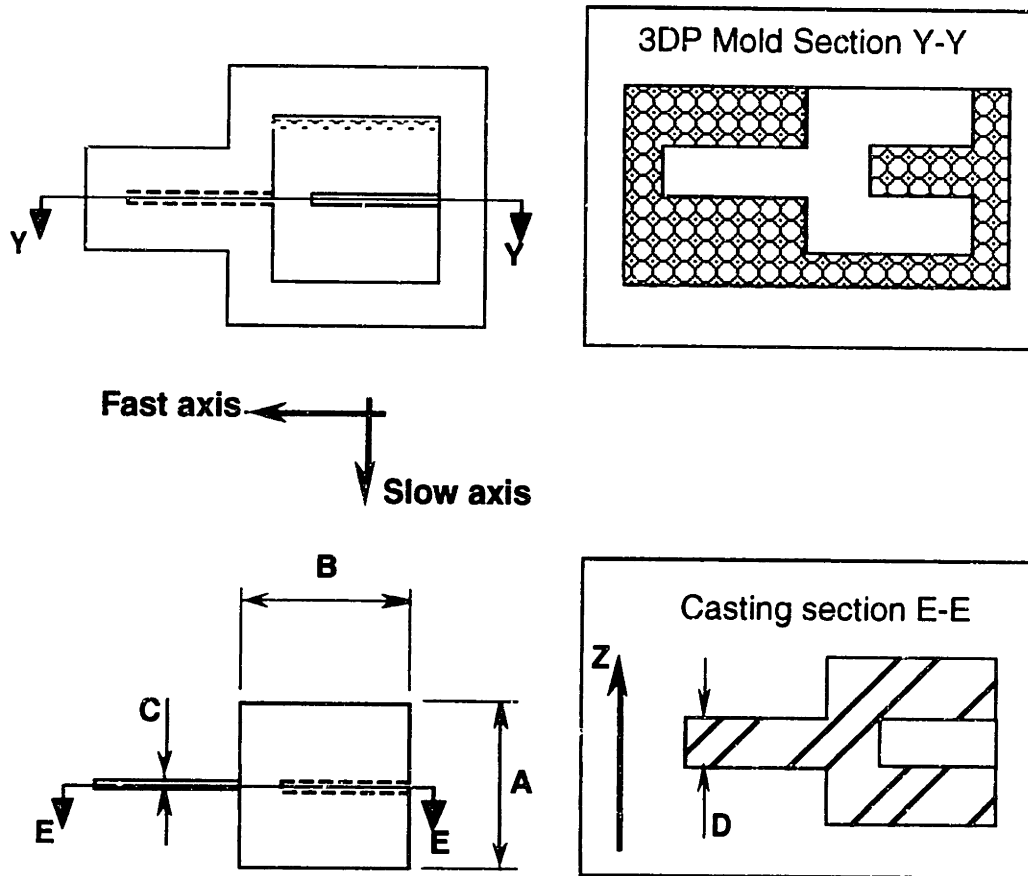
Schematic of the mold & casting dimensional analysis test sample.
